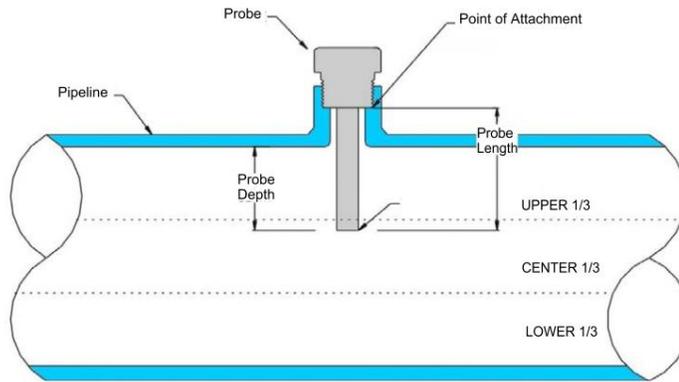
Probe Dimensions Used to Determine Maximum Recommended Probe Length
